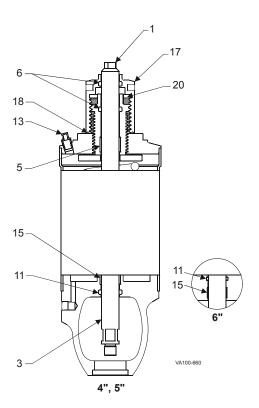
4", 5" and 6" Air-to-Raise, Adjustable-Spring Actuator
